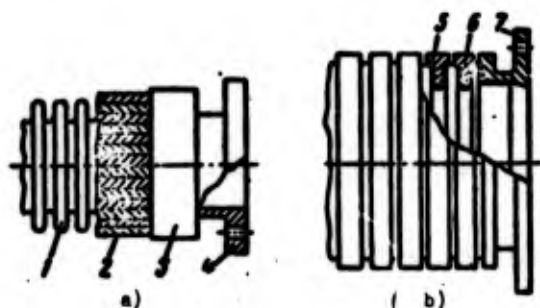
Design of flexible pipelines: a) with braiding; b) with rings of rigidity; 1 - bellows; 2 - braiding; 3 - sleeve; 4 - flange; 5 - bellows; 6 - ring of rigidity; 7 - flange.
